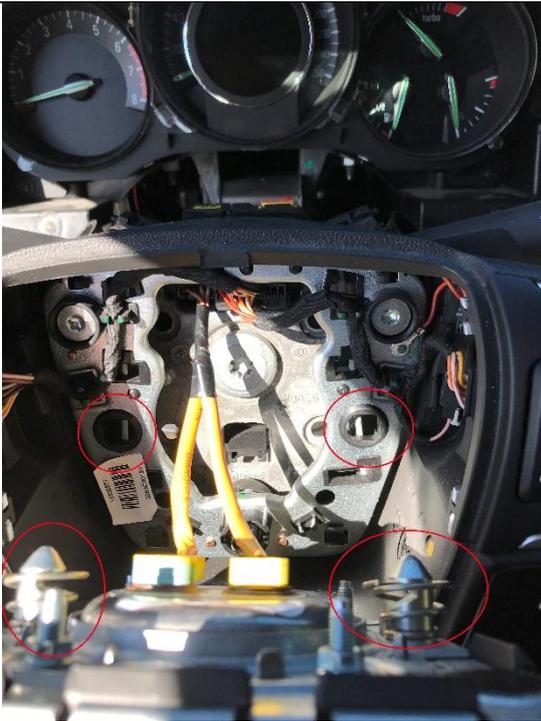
Picture that shows a removed airbag. The red rings indicate the fasteners and the loaded spring that holds the airbag in place.
